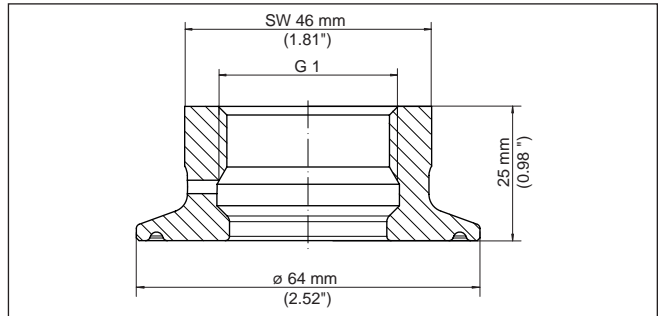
Dimensions hygienic adapter G1 (DIN 3852-X) on Clamp 2" (DIN 32676, ISO 2852) PN 40 - O-ring seal
